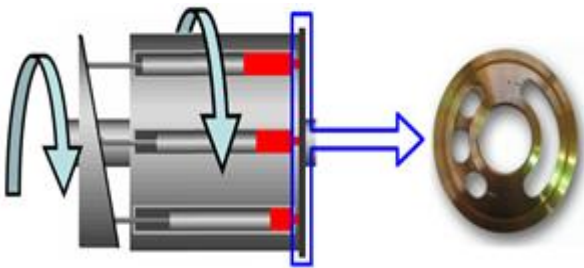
valve plate of swash plate type piston pump<sup>[3]</sup>
